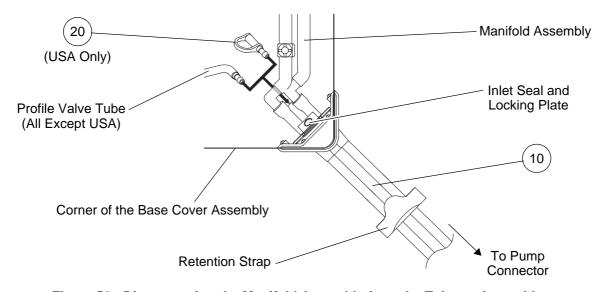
Disconnecting the Manifold Assembly from the Tubeset Assembly
